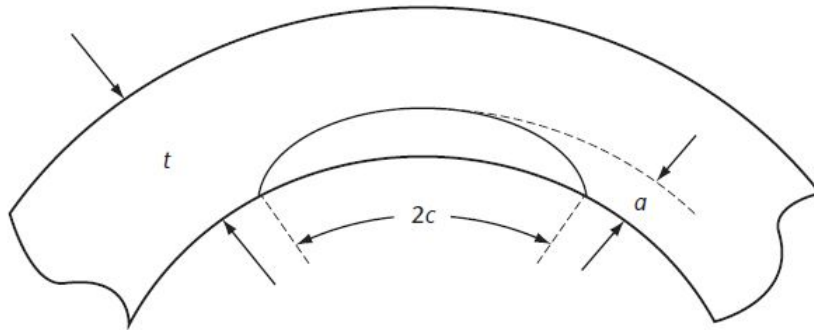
A planar surface-breaking defect in the pipe wall [9]
